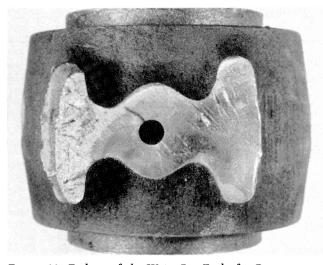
Failure of the Wrist Pin End of a Reciprocating Compressor Connecting Rod Showing Two-Step Fatigue Fracture.
